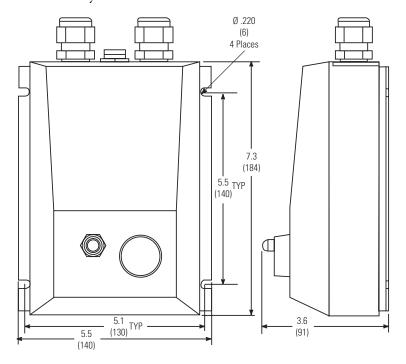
Control Box Mounting Dimensions 77111-60 (115V).
